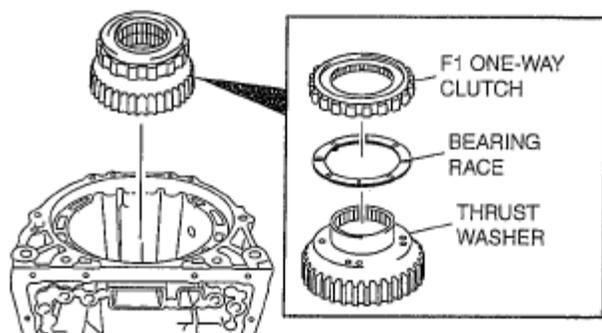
Identifying Thrust Washer And Front Planetary Gear Component
